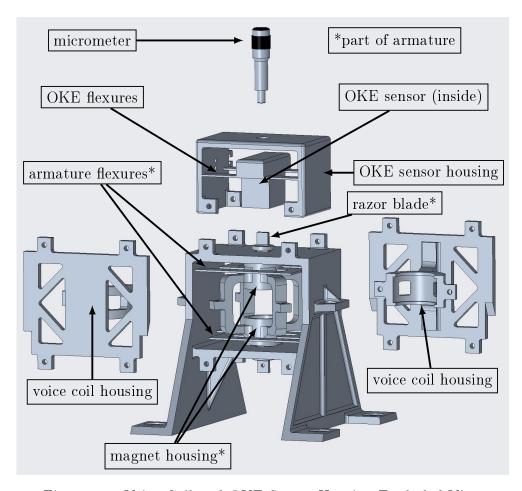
Voice Coil and OKE Sensor Housing Exploded View
